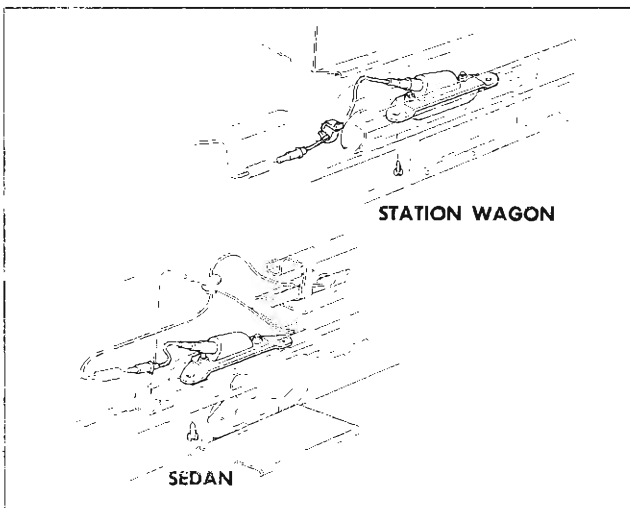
License Plate Lamp Assembly (Chevrolet)
